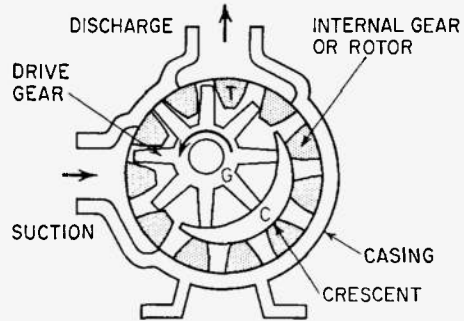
Crescent Seal Internal Gear Hydraulic Pump [Shown are: crescent C, gear teeth T, and drive gear G]
